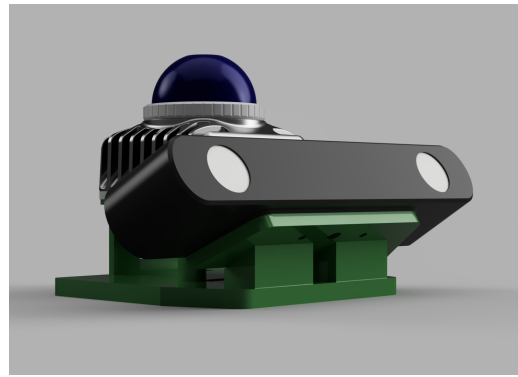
Testing Setup used with Angled Camera at 30° and Horizontal LIDAR
